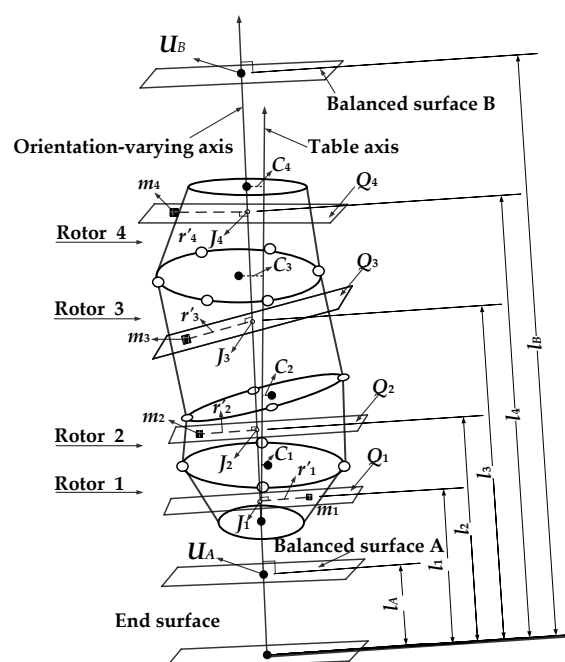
Assembly datum for unbalance optimization of four-stage rotor.
